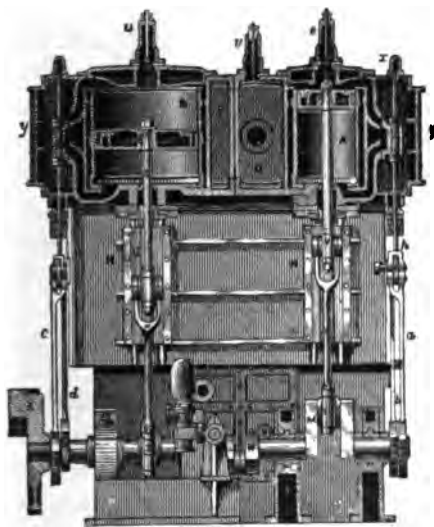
COMPOUND MARINE ENGINE (SECTION).
